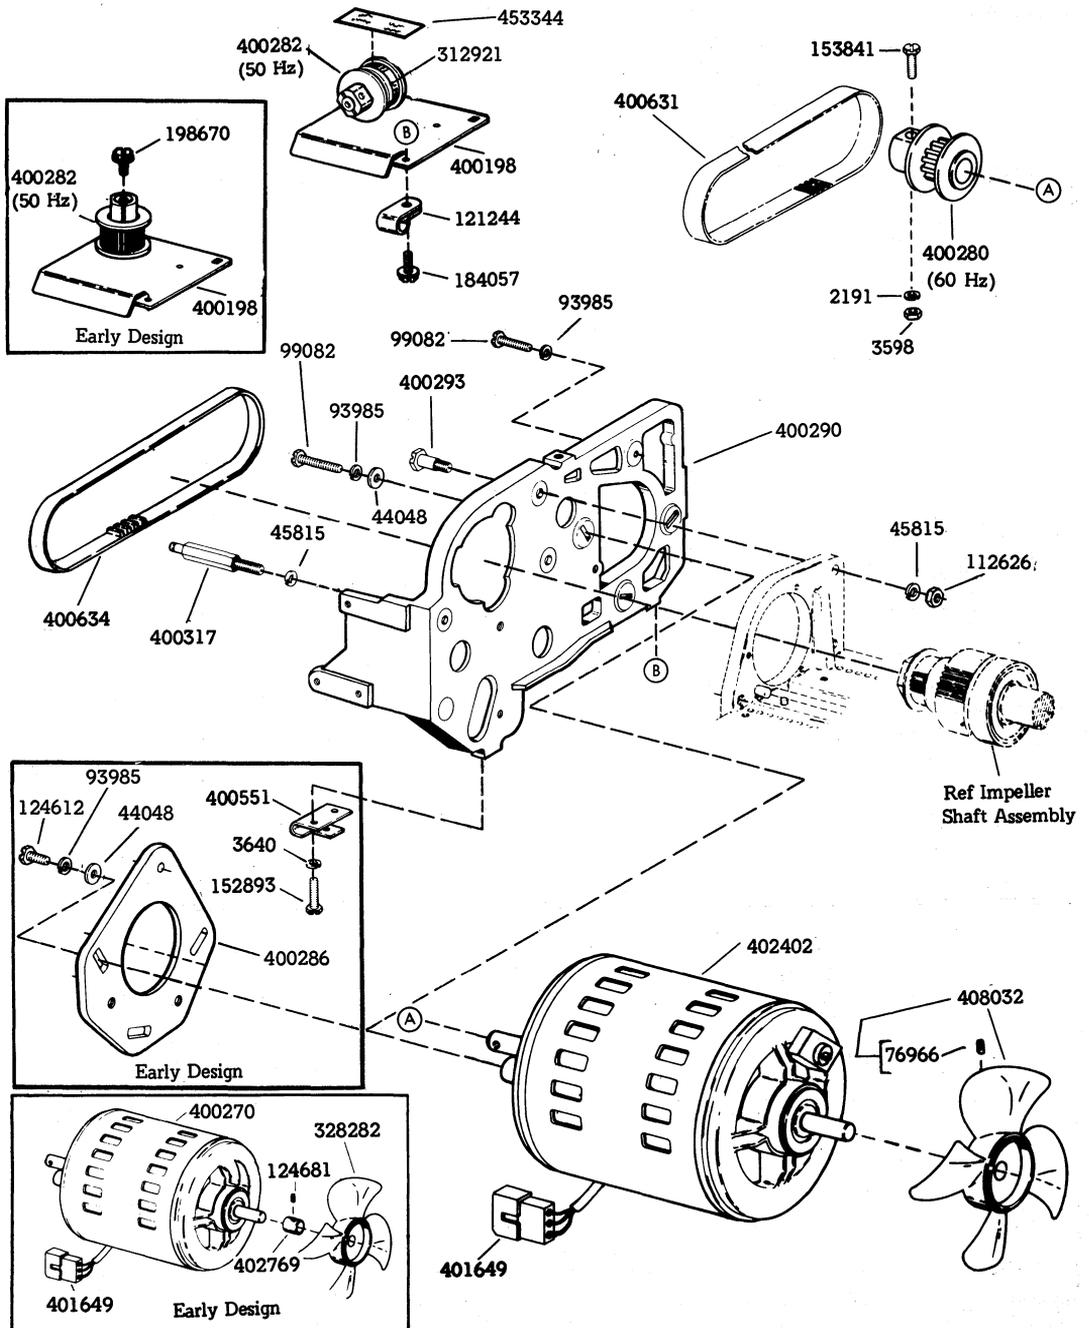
Left Casting and 402402 Motor (Friction Feed)
